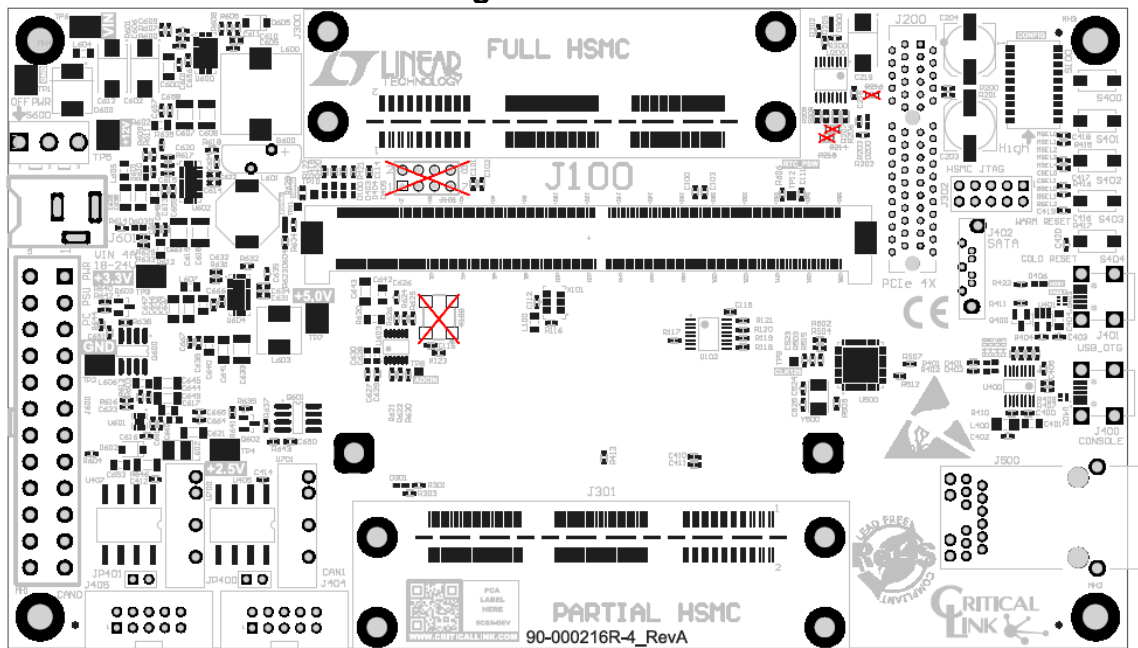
MitySOM-5CSX Development Kit Outline, Mounting Hole Locations, (Top View, inches)
